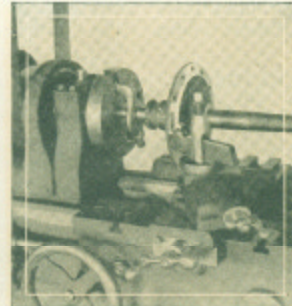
Machining a Damaged Truck Wheel Flange on Its Own Axle
